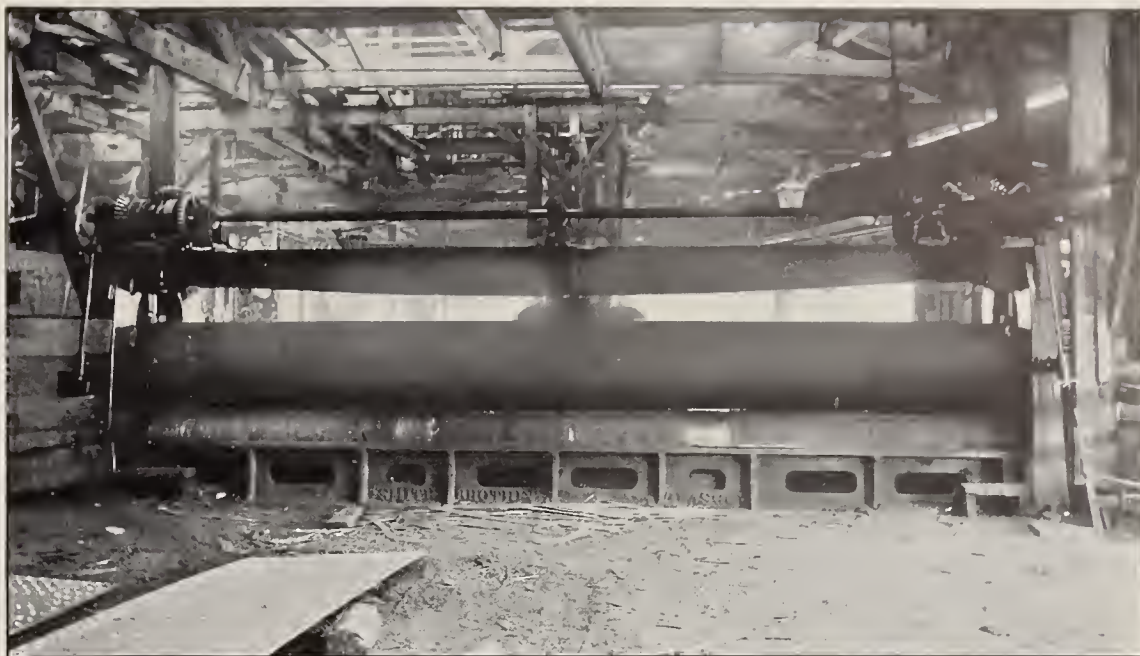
ROLLS FOR HEAVY SHIP PLATES AT THE YARD OF MESSRS. FURNESS, WITHY & CO., AT HARTLEPOOL, DRIVEN BY ONE OF THEIR 40-H. P. CONTINUOUS-CURRENT MOTORS
